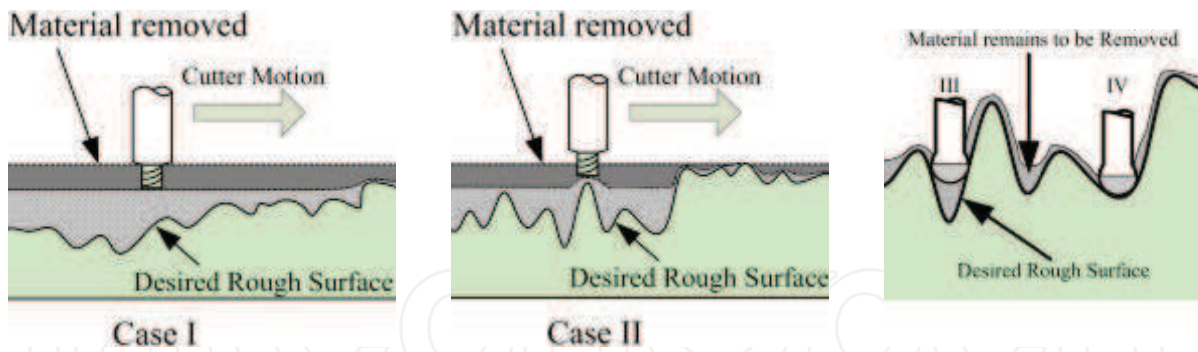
(a) Coarse machining process for the rough surface. For Case I, the full cutting edge is used to remove material; for Case II, the cutter is lifted upward 1 mm to avoid overcutting the surface. (b) Fine machining process for the rough surface. For Case III, the radius of the cutter is larger than the curvature of the valley so an undercut is encountered, as opposed to Case IV where the cutter reaches the desired surface.
